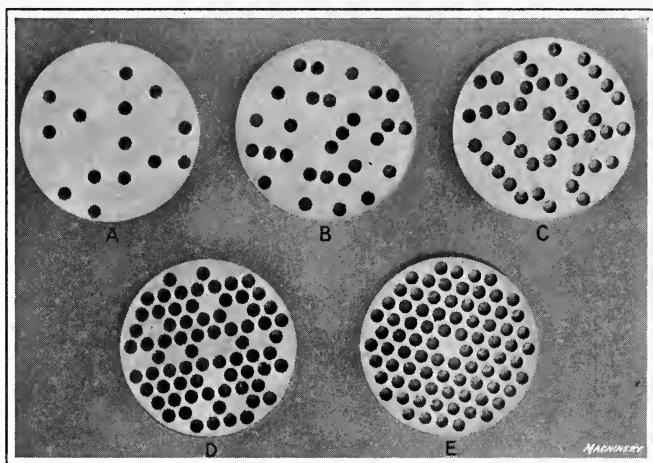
Condition of Work done on Machine shown in Fig. 25, after First, Second, Third, Fifth, and Sixth Drilling Operations have been performed
